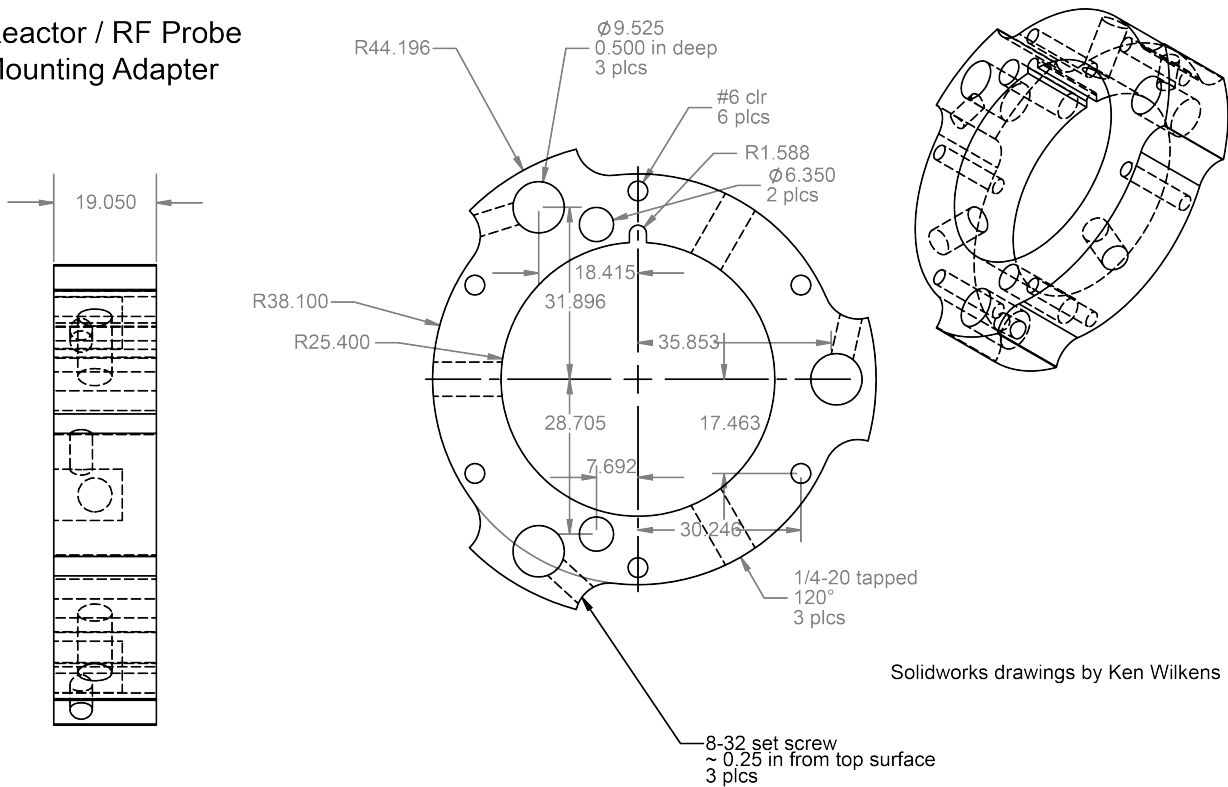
Drawings for mounting adapter for reactor and RF probe connections. Dimensions are mixed in mm and inches. The top reactor top cap (Figure S9) is used for mating with this component using set-screws. Dimensions are mixed in mm and inches.
